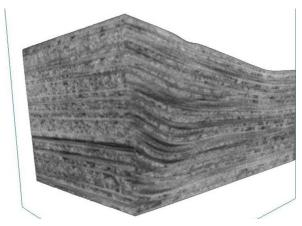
A CT volume slice shows wrinkles and voids in a Glass/Epoxy laminate structural detail.
